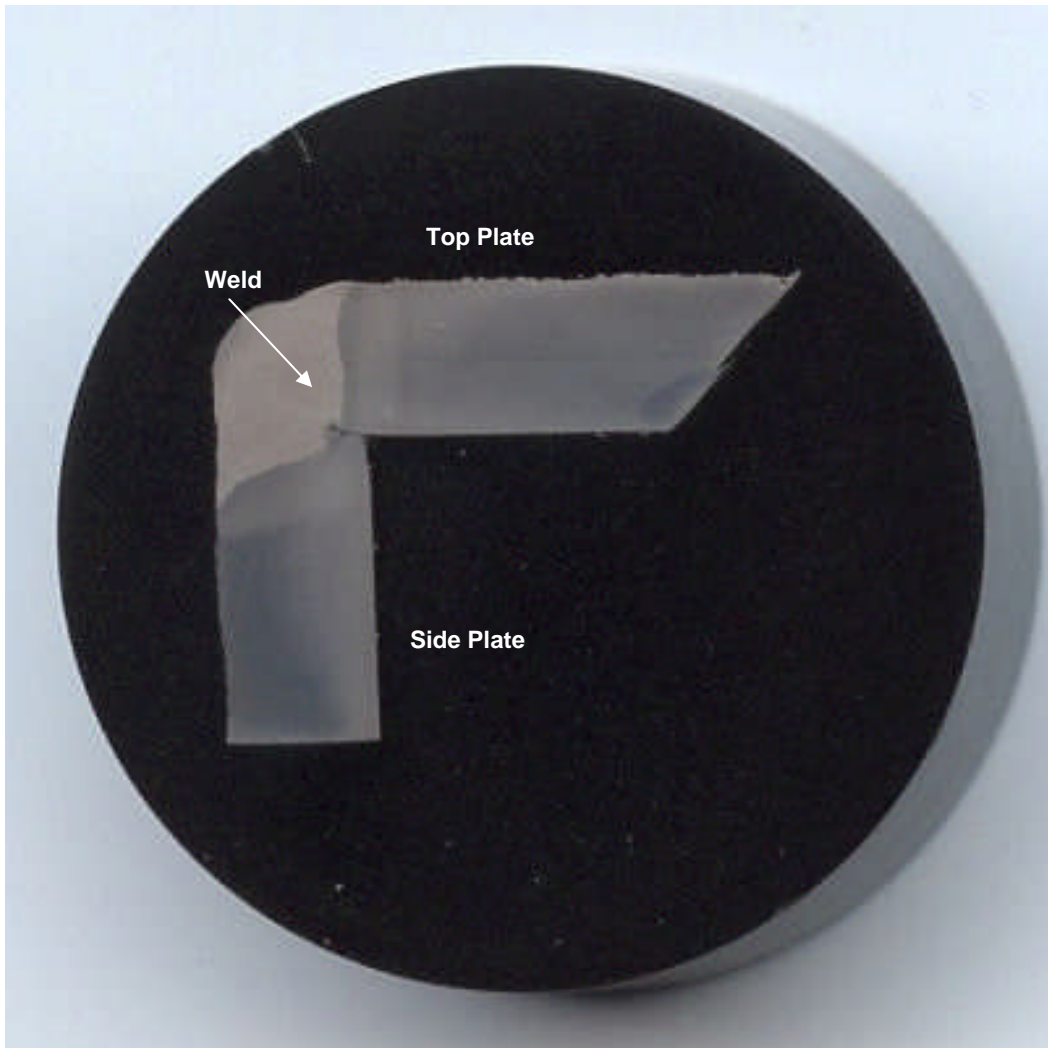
Section Through Longitudinal Weld (Arm No.9)
